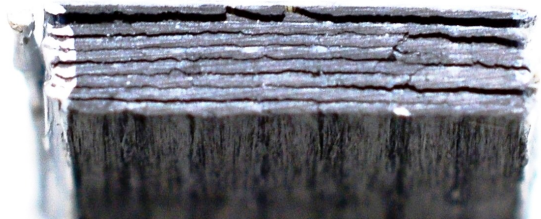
Cross-sectional view of a specimen in shear failure
